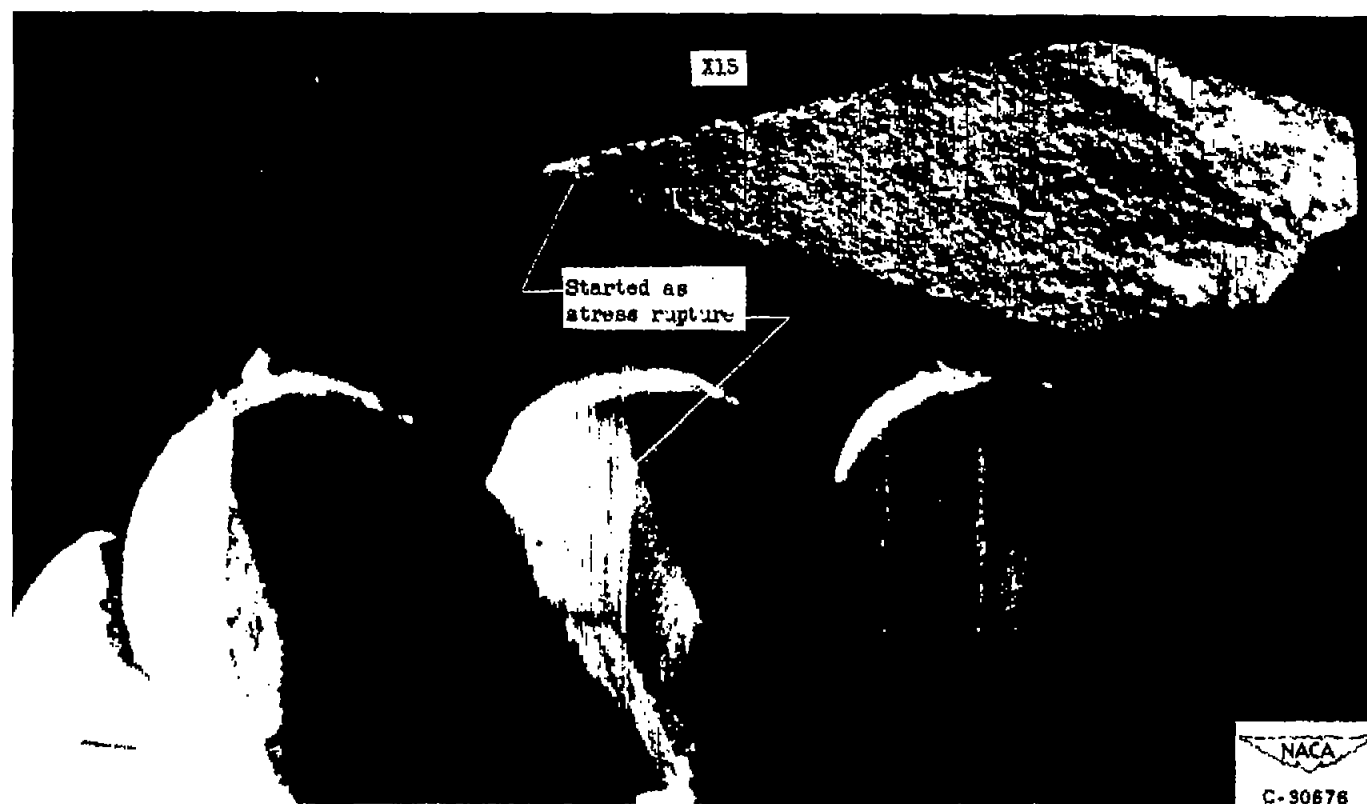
Types of specimen fracture obtained from tensile-fatigue evaluation of Stellite 21.
